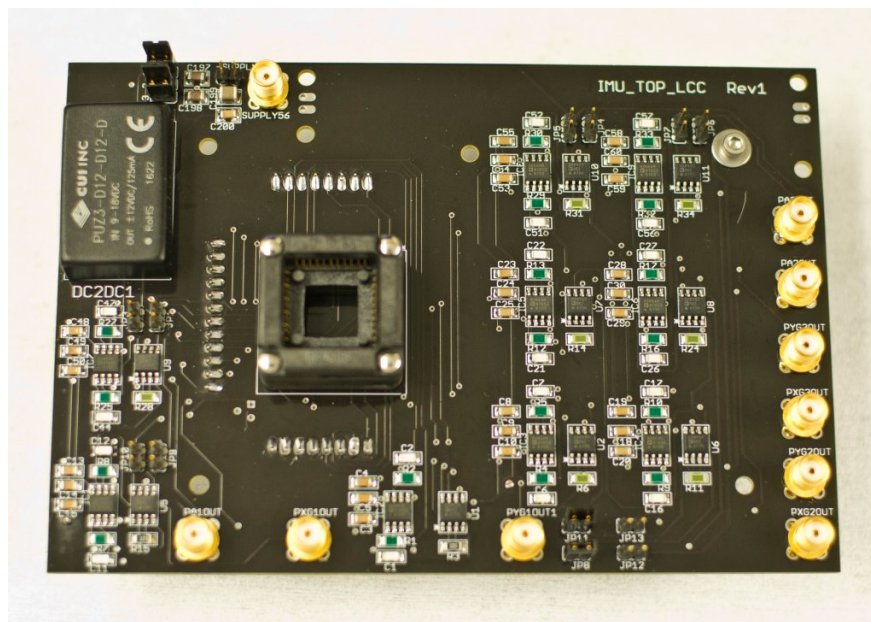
Assembled top PCB with pick-off channels for 3 gyroscopes and 3 accelerometers.
